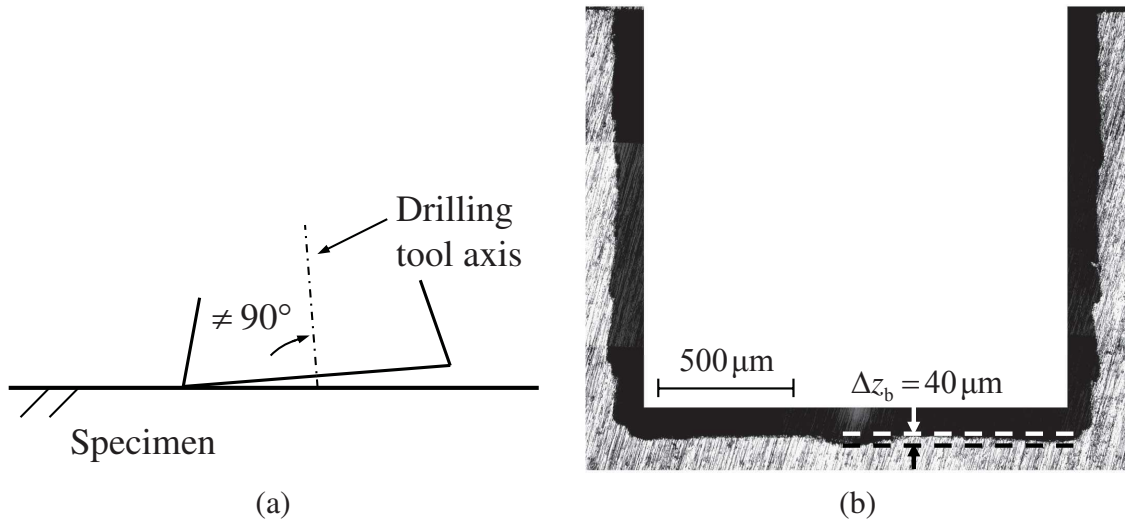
Section of the hole: (a) not perfect perpendicularity between drilling tool axis and specimen surface (here exaggerated), (b) not perfect flatness of the hole bottom surface.
